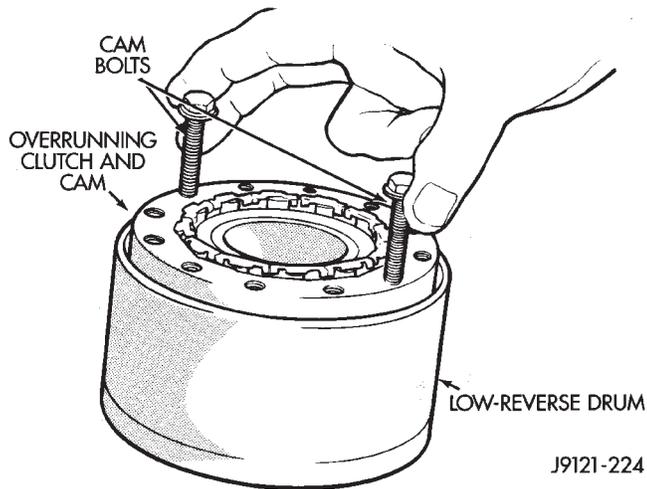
Removing Overrunning Clutch From Low-Reverse Drum
